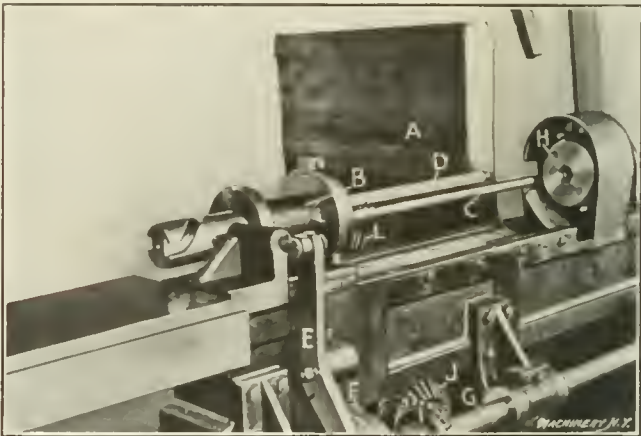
Automatic Machine for Sizing the Tubes to the Correct Diameter
